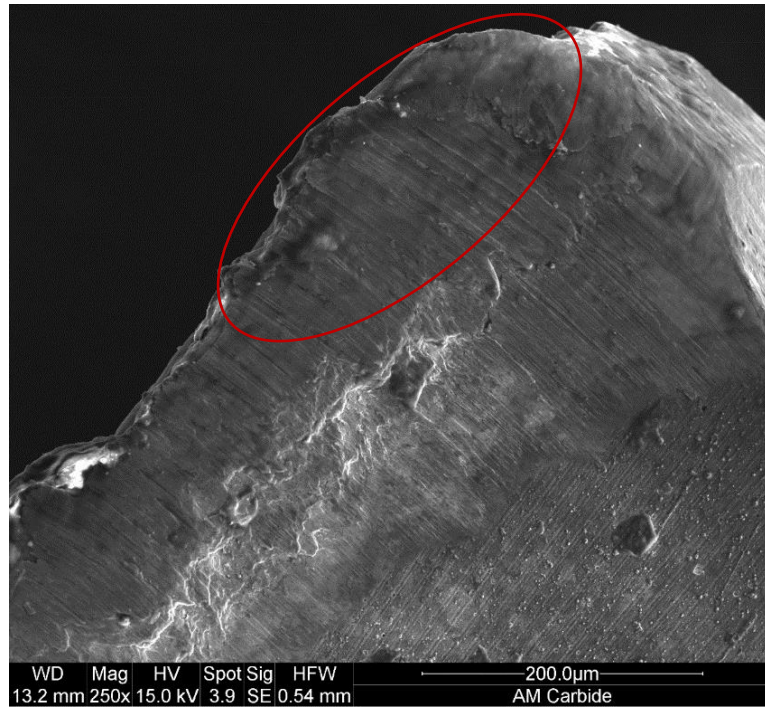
250x SEM top down view of the carbide drill bit cutting edge after drilling 60 holes in AM titanium.
